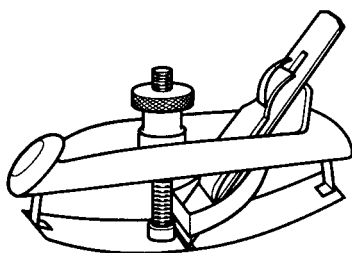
The compass or circular plane with an adjustable sole to fit both convex and concave surfaces.
